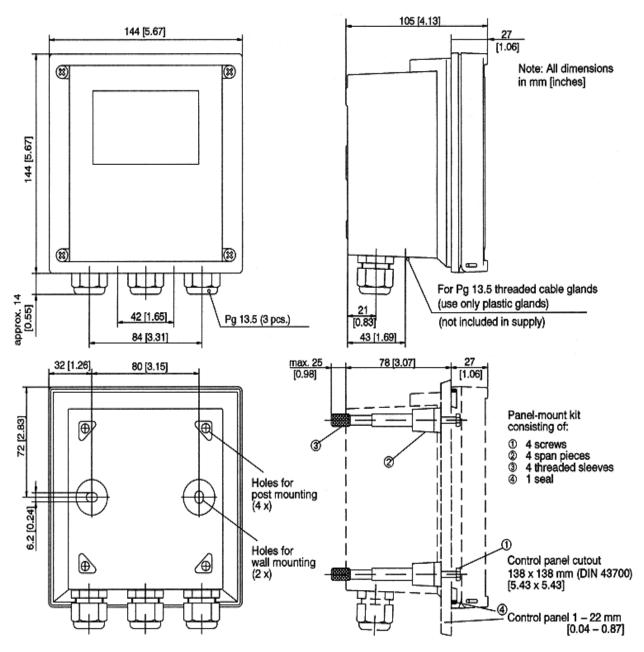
Dimension Drawing for APT2000 and P/N 51205990-001 Panel Mounting Kit
